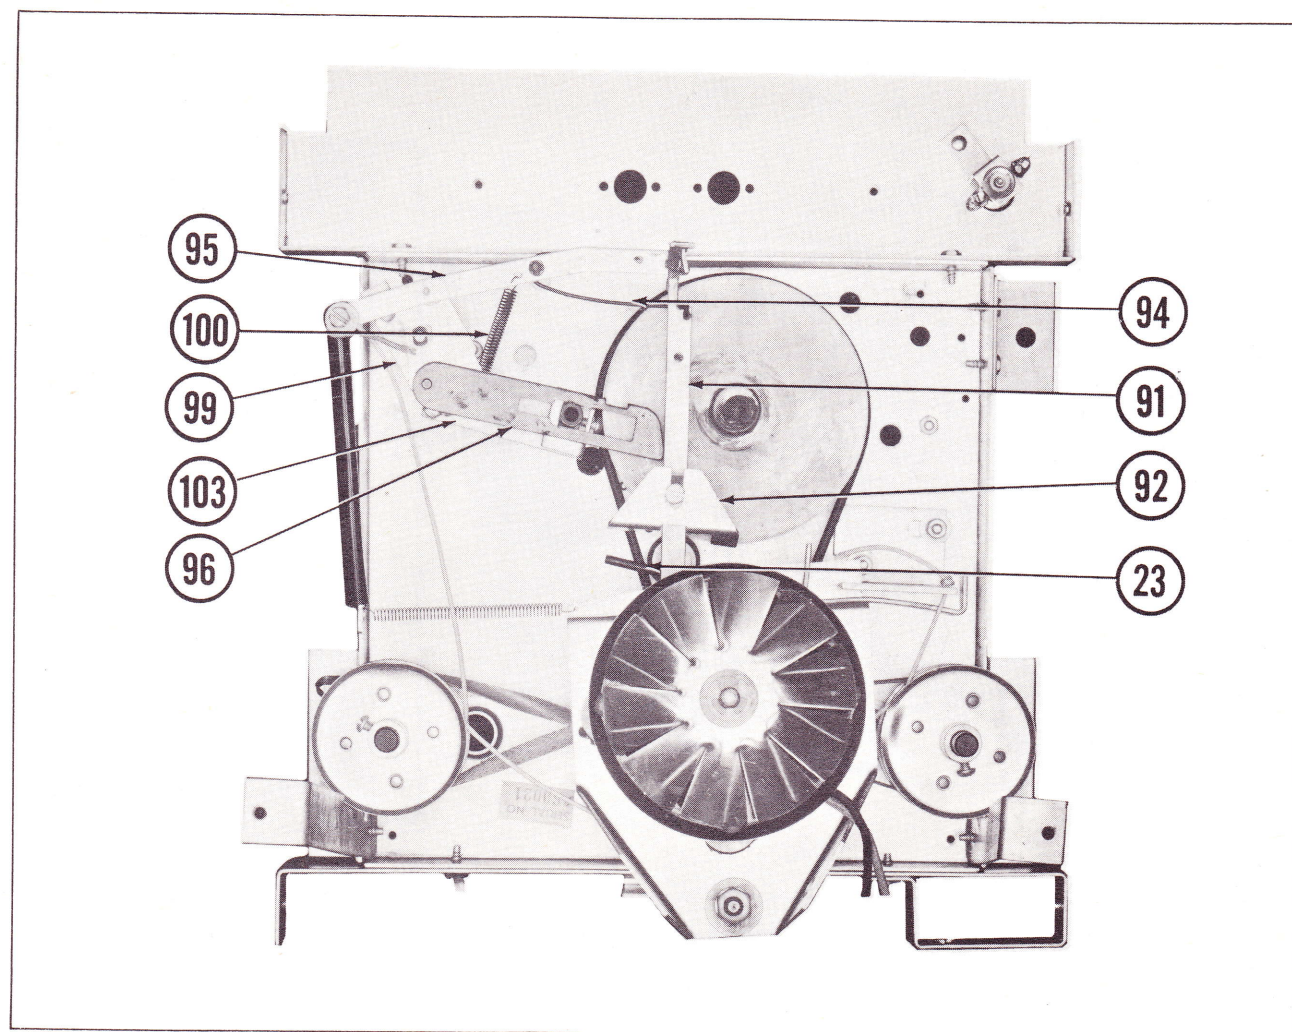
BOTTOM VIEW OF MECHANISM WITH MOTORBOARD SUBPLATE REMOVED
